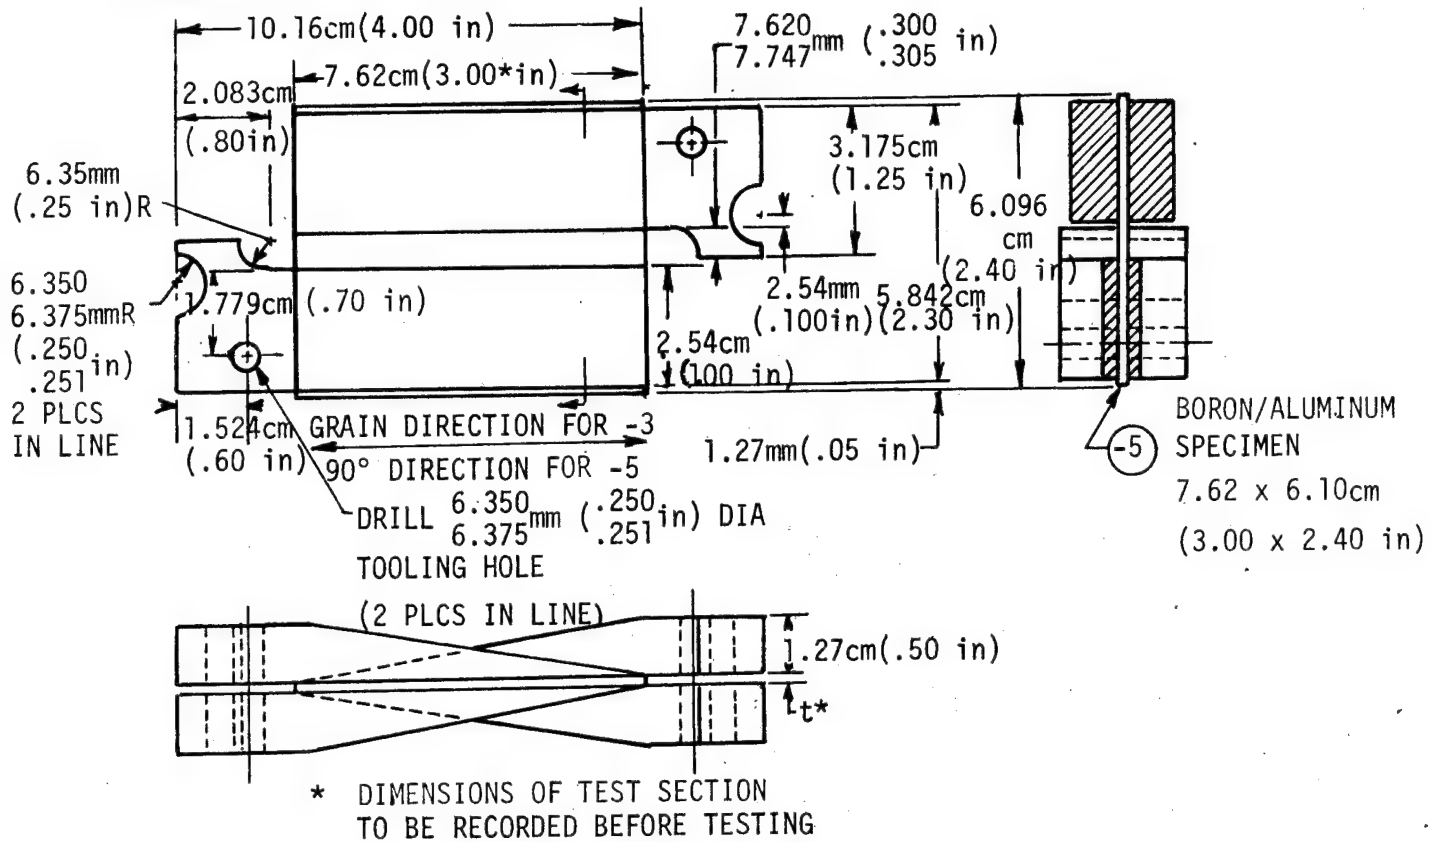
Specimen Assembly - Modified IITRI Tension Test
